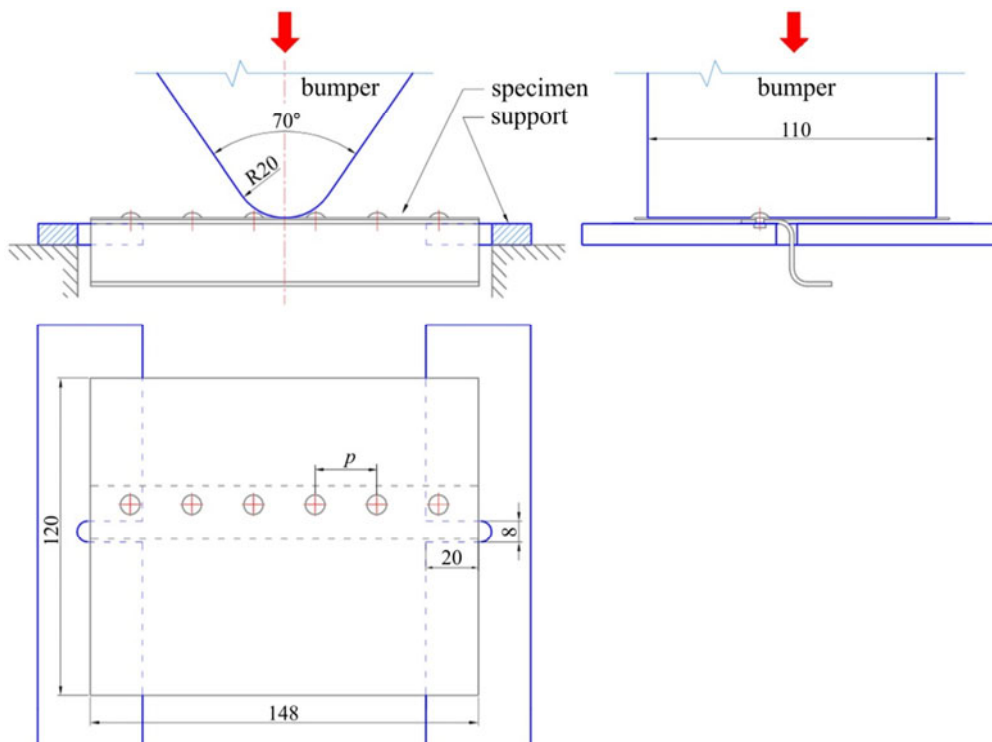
Dimensions of the specimen and configuration of the drop-weight test fixture (dimensions in mm)
